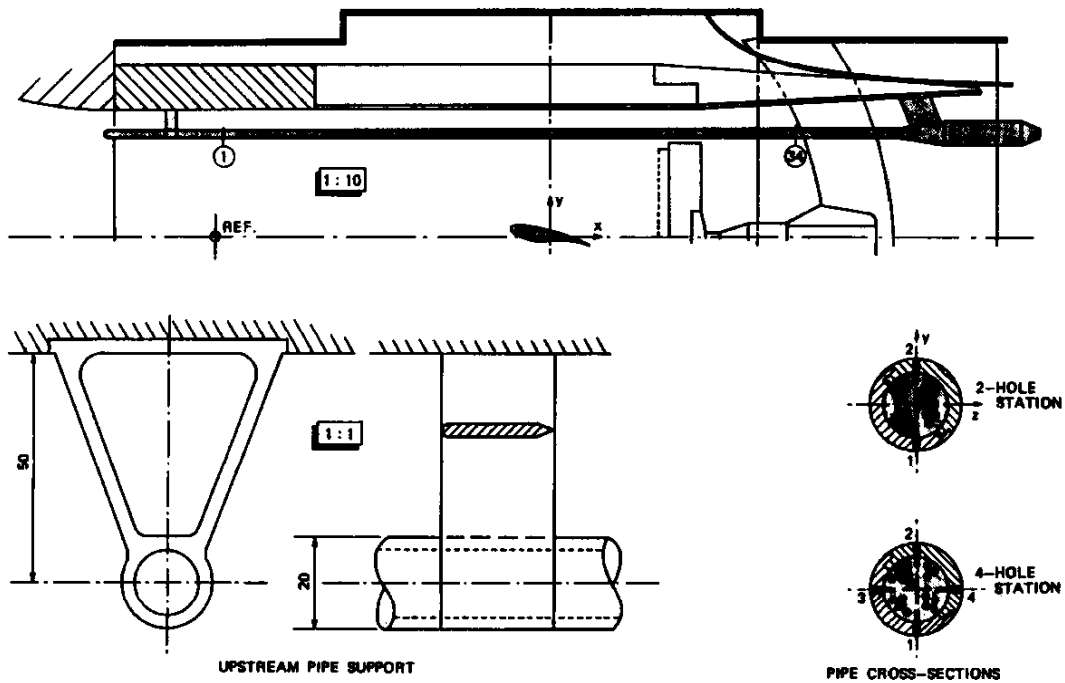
Calspan pipe and its mounting in the NLR Pilot Tunnel
